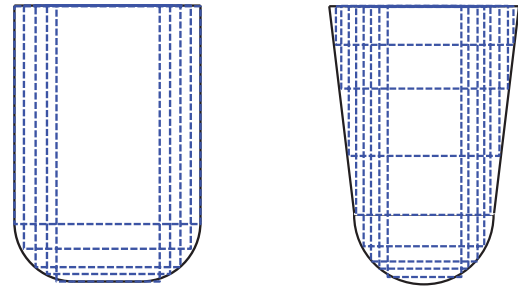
Ball end mill expressed by superposition of square end mill.
